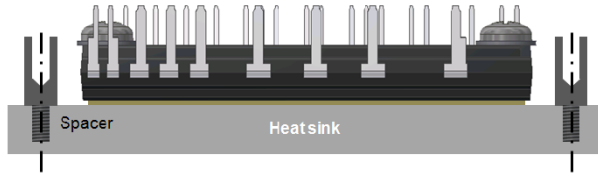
Process Flow of Mounting a SPM 2 (ASPM 34) Package (when PCB mounting first)
